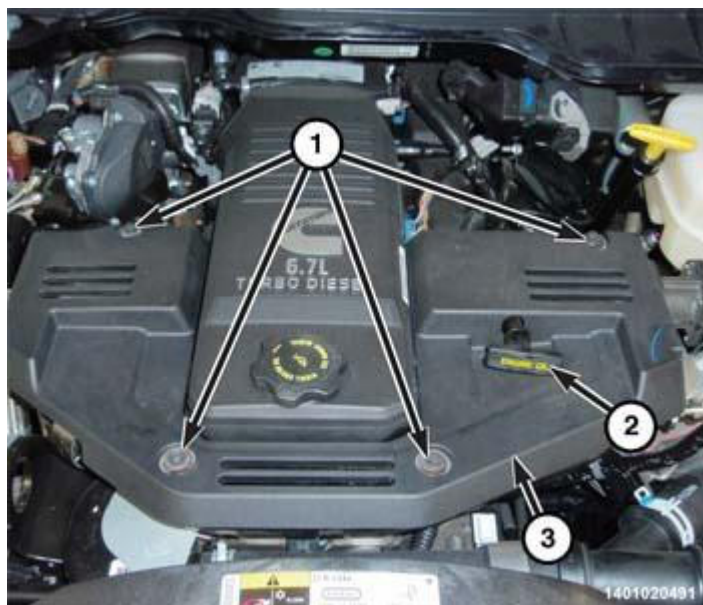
Engine Cover, Bolts & Oil Dipstick
